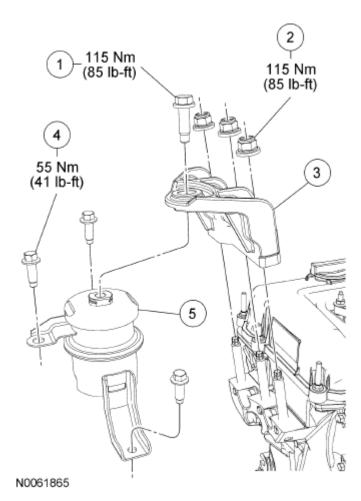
Identifying Engine Mount Components Courtesy of FORD MOTOR CO.
